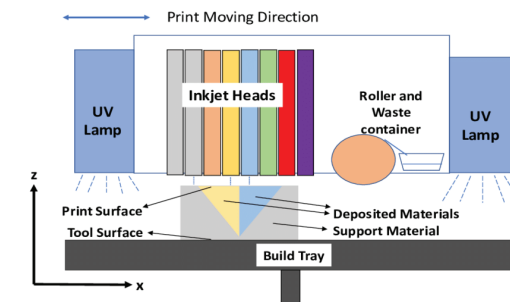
printhead configuration (*PolyJet Printing Printhead and Roller*, n.d.)
